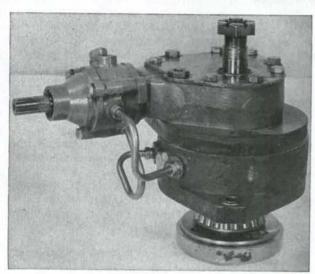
Power steering control valve, steering gear and steering motor unit removed from trac-tor, Sector shaft is shown inserted for illustrative purposes.
